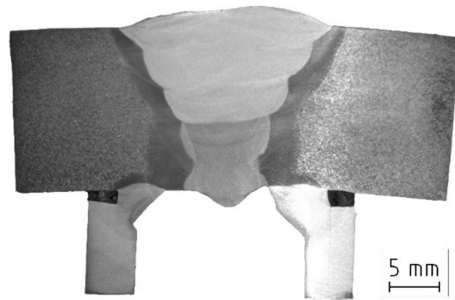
Macrograph of butt weld joint between sphere-like parts of the sleeve.
